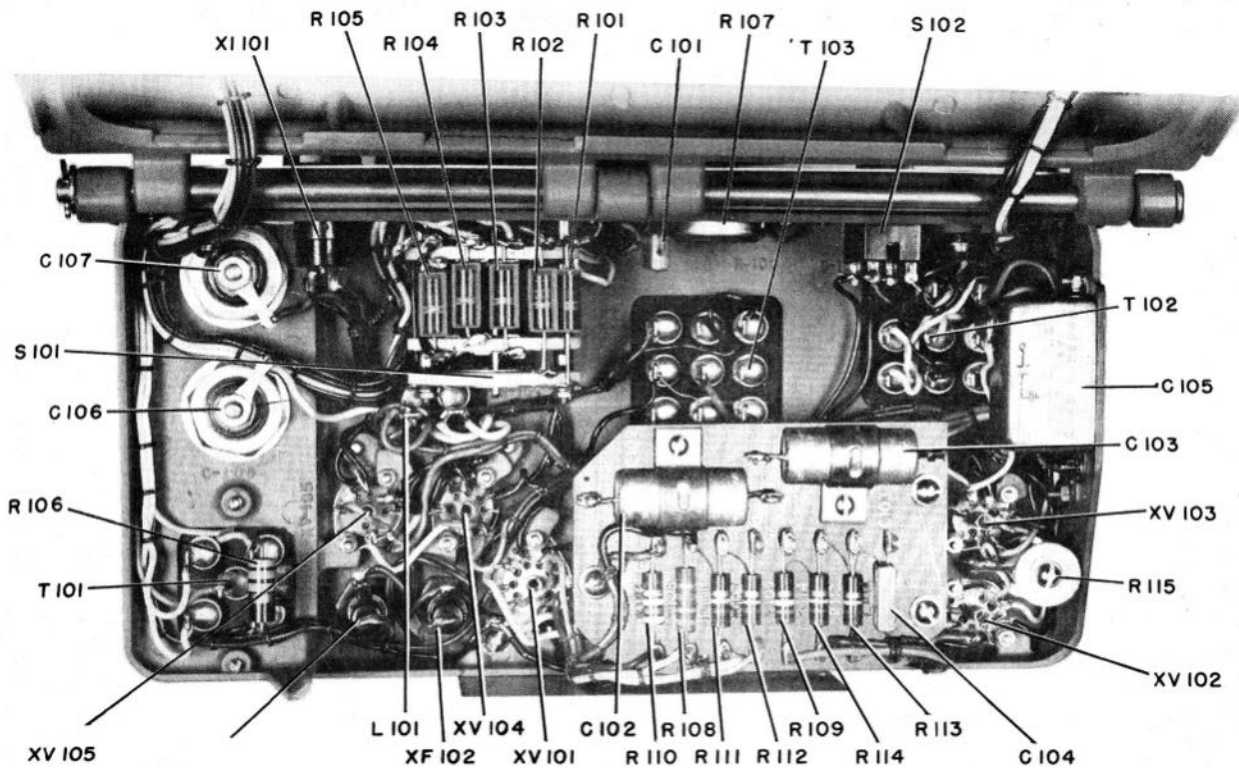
AF Amplifier AM-215A/U Components, Bottom View
